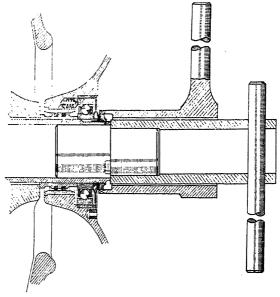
Showing application of both spanners removal of impellor shaft nut.
